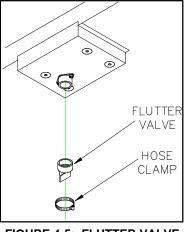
FLUTTER VALVE (DRAIN)
